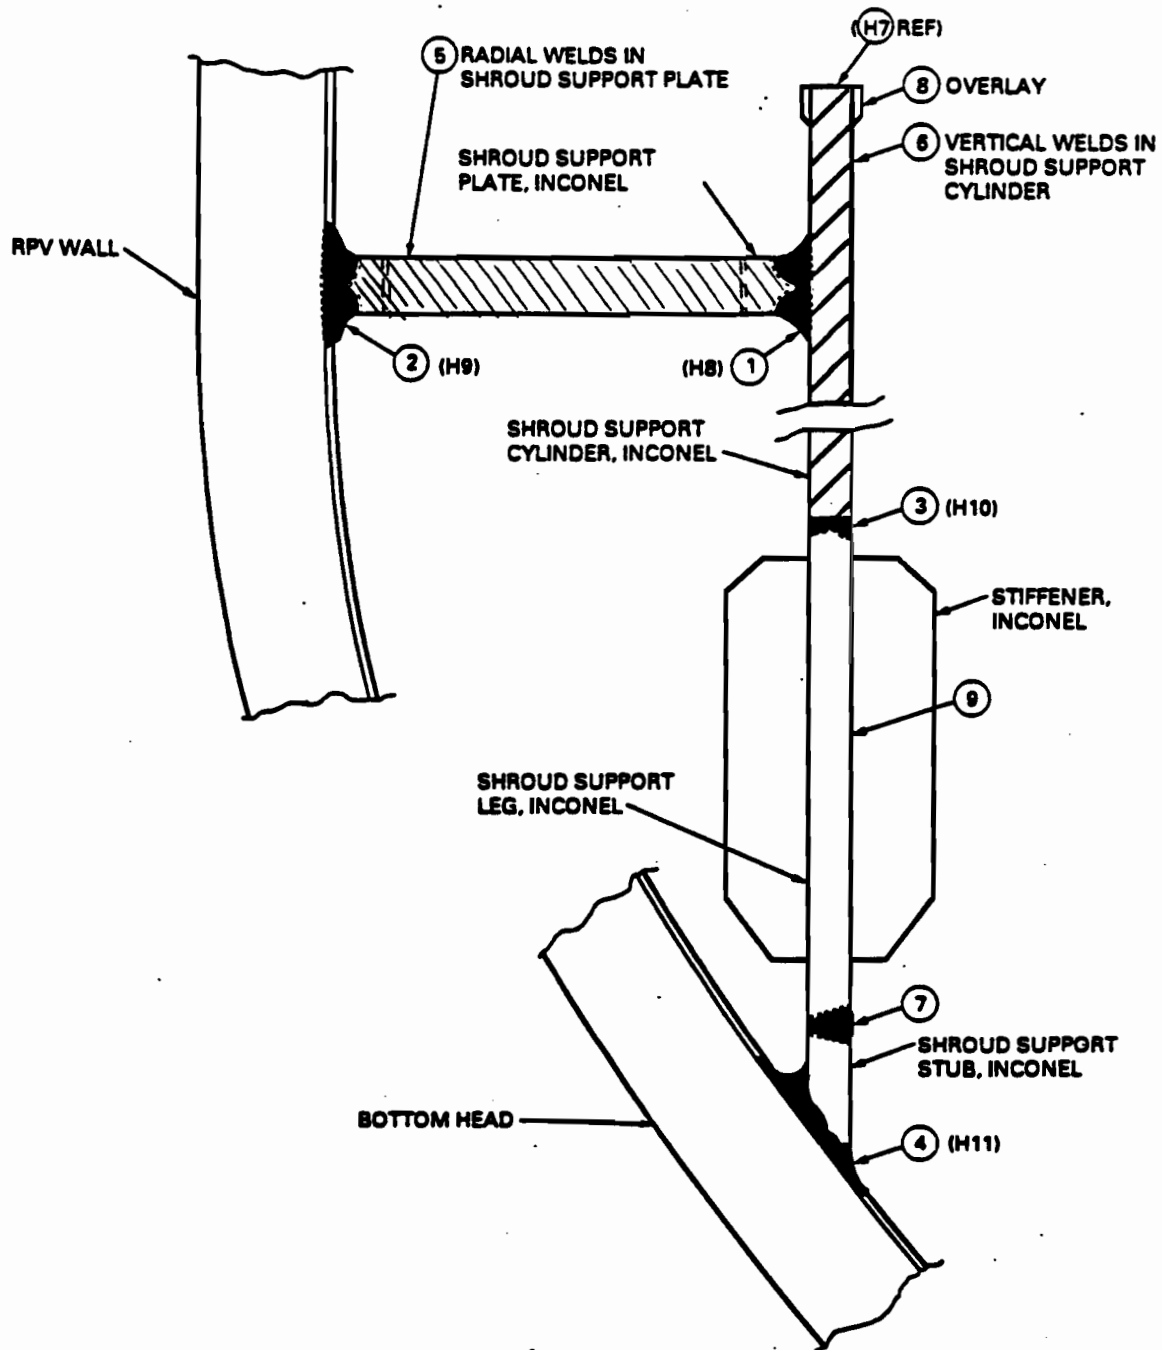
Illustration of shroud support plate region and welding (Ref. A-2).
